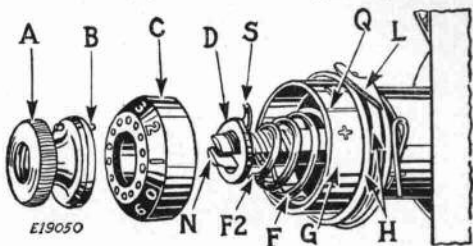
REASSEMBLING AND REPLACING THE TENSION
